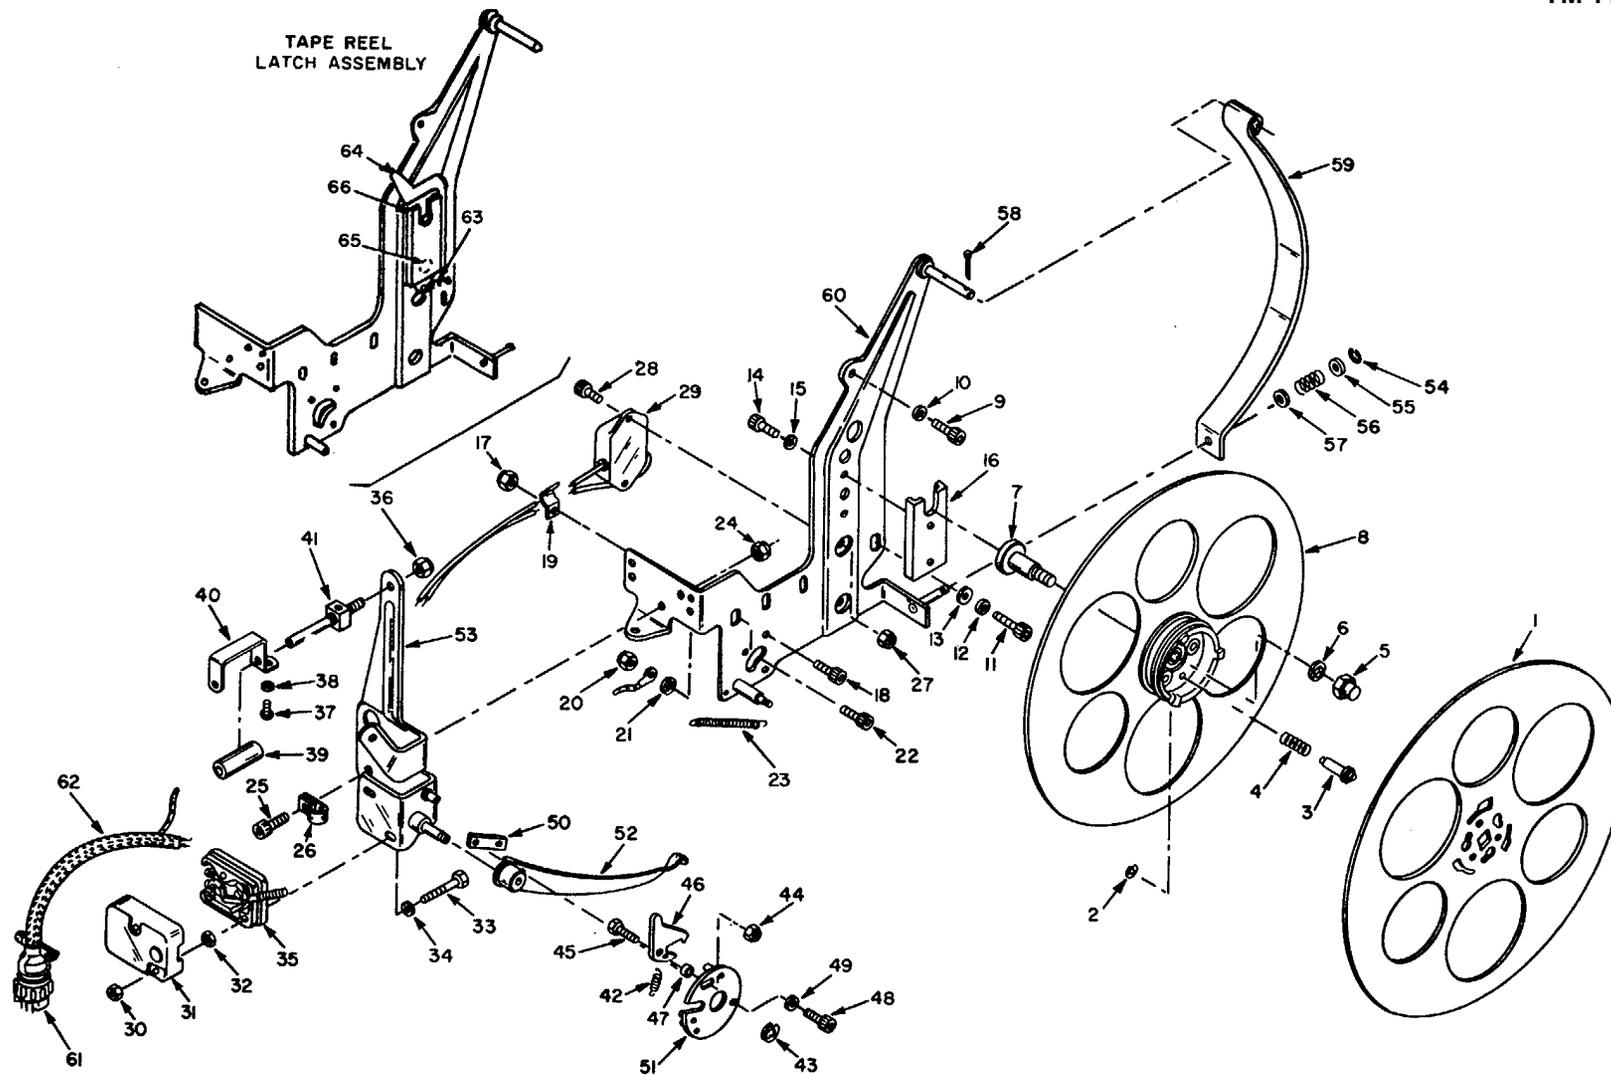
Tape reel, exploded view (TT-76A/GGC and later models).
